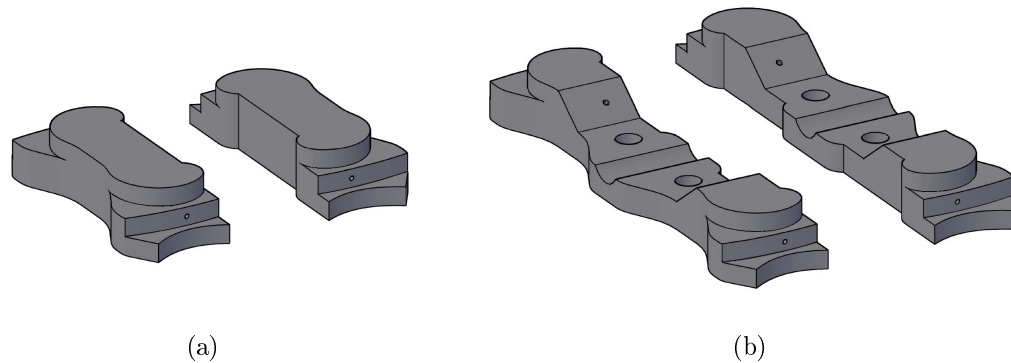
Geometry of the flex-ten bow. 3D-CAD drawing of (a) the typical segment (3/4 view of belly side and back side) and of (b) the handle (3/4 view of belly side and back side).
